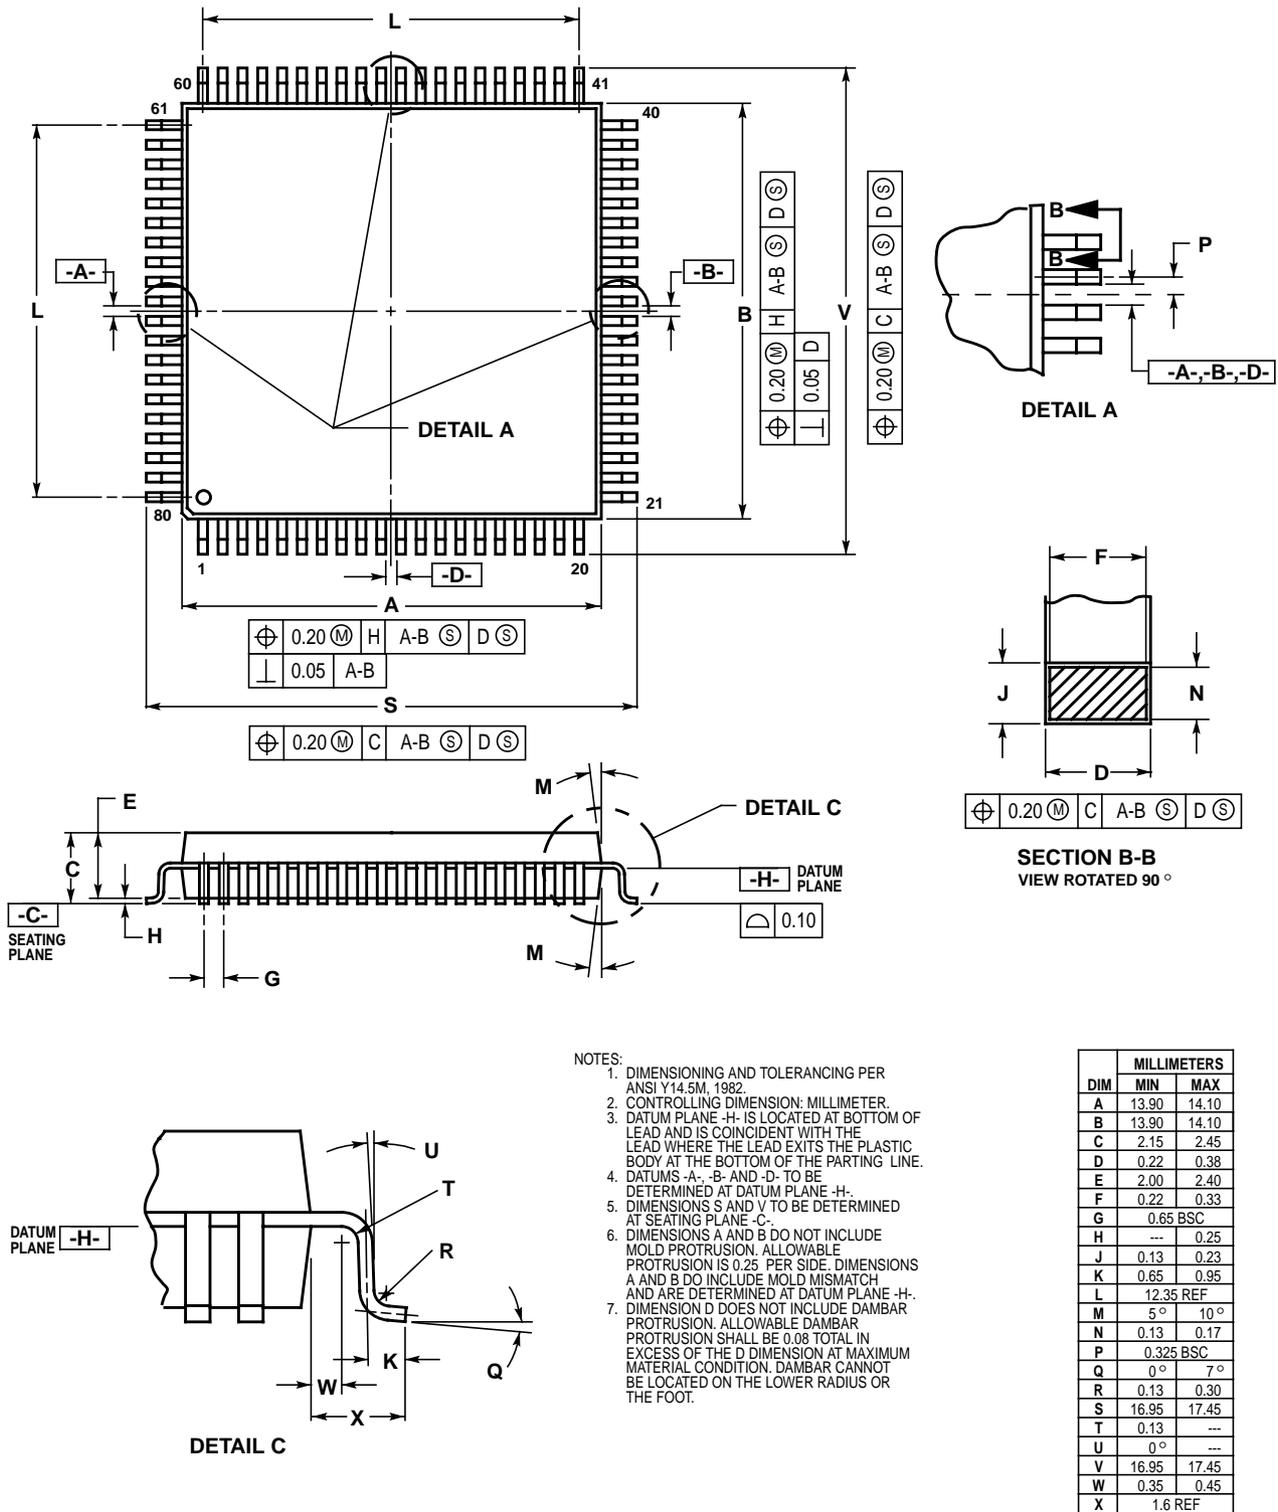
80-pin QFP Mechanical Dimensions (case no. 841B)
